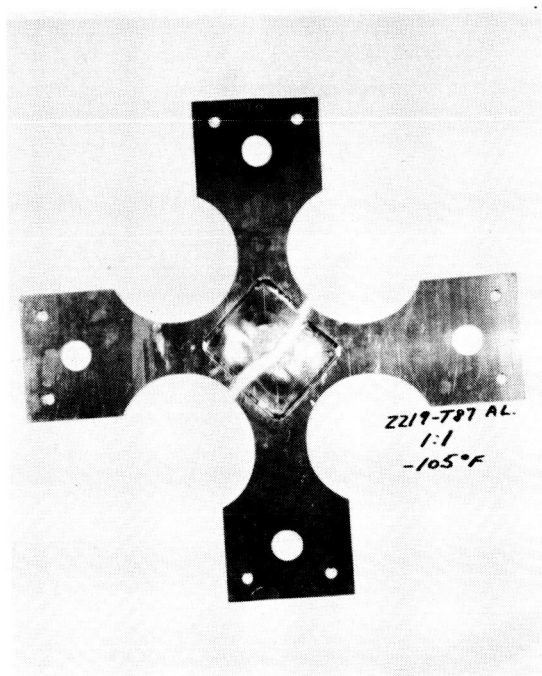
FAILED 1:1 BIAXIAL TEST SPECIMENS (WELDED AND UNWELDED CONDITION)
